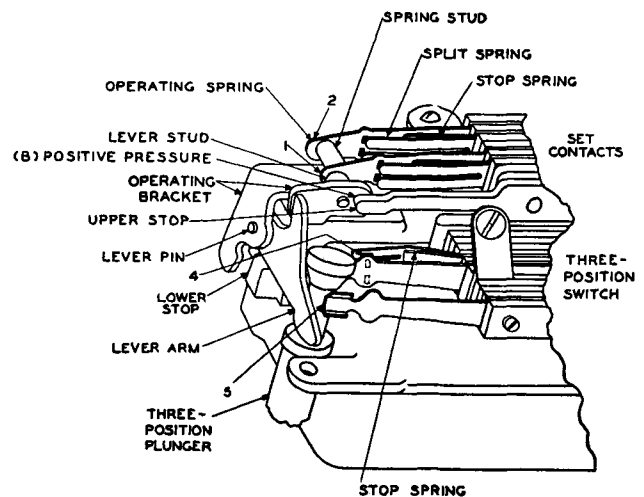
3-Position Switch (H13 and H14—Type Mountings)
